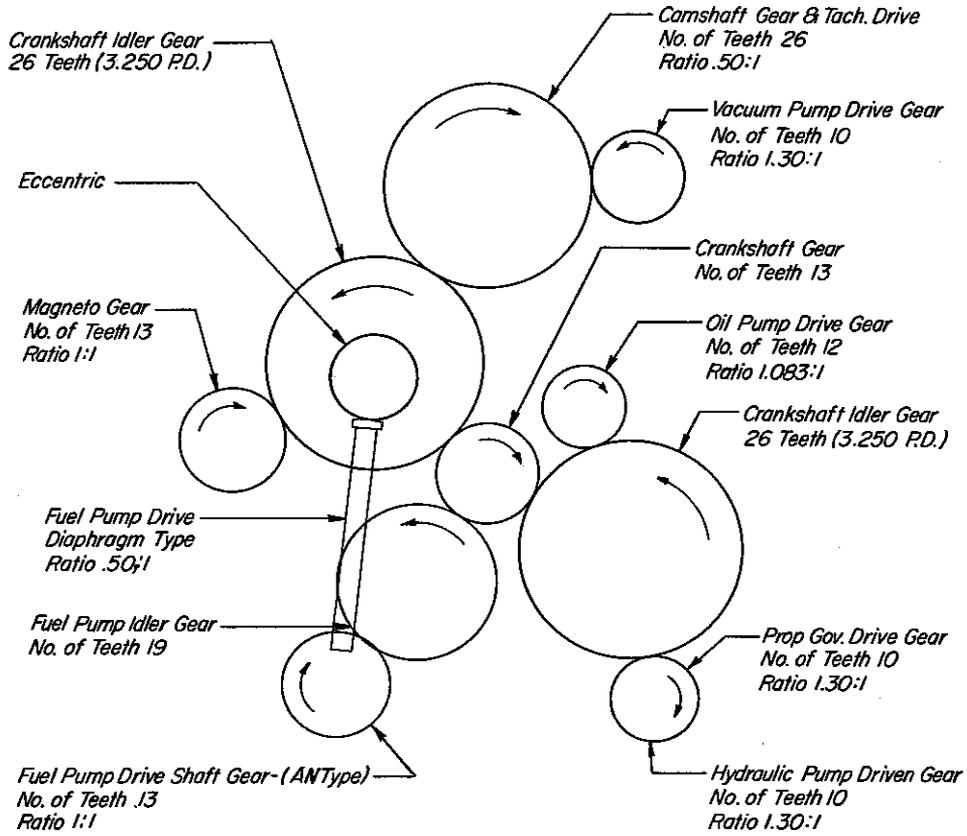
Gear Train Diagram - Typical 4 Cylinder (Dual Magneto Housing)
